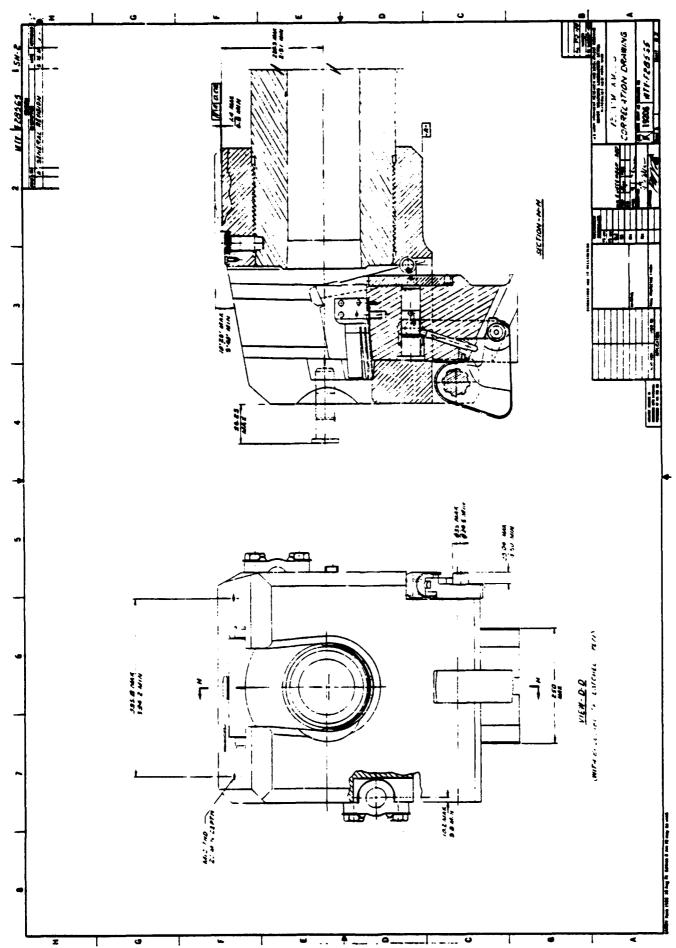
Drawing depicting the M256 breechblock as it is installed in the M256 breech ring assembly.
